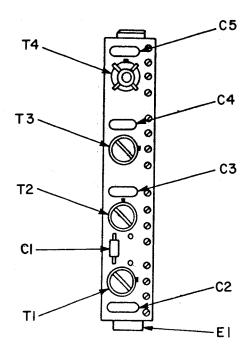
16 MHz Subassembly A2A4A6, Component Locations
